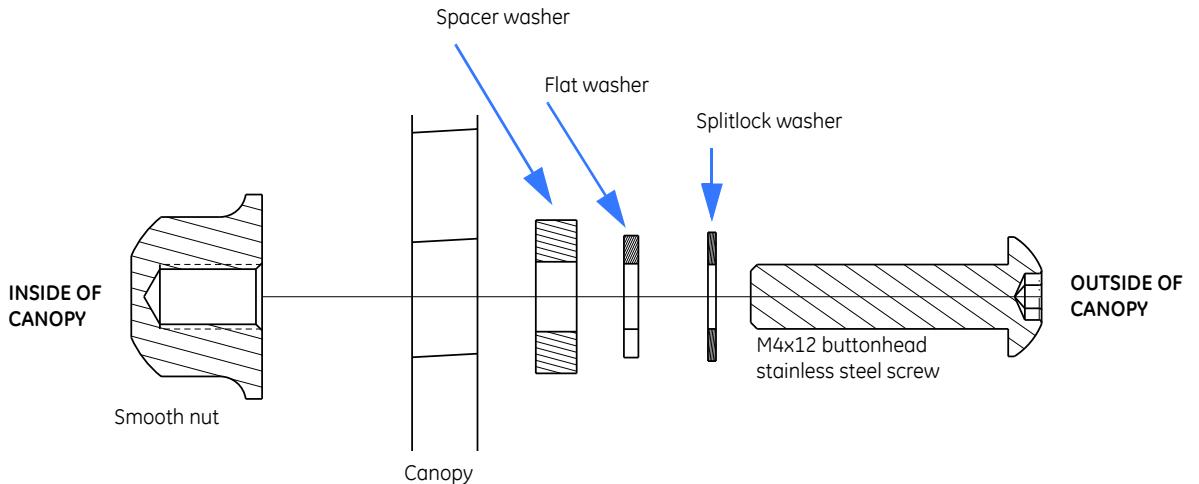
Hole Fill Assembly (2x) for Canopies with Six Holes across North End
